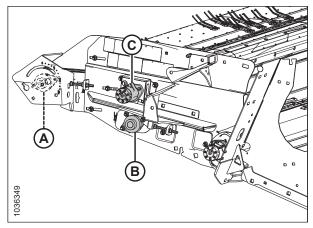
Bearings with Grease Fittings – Left Side of Header
